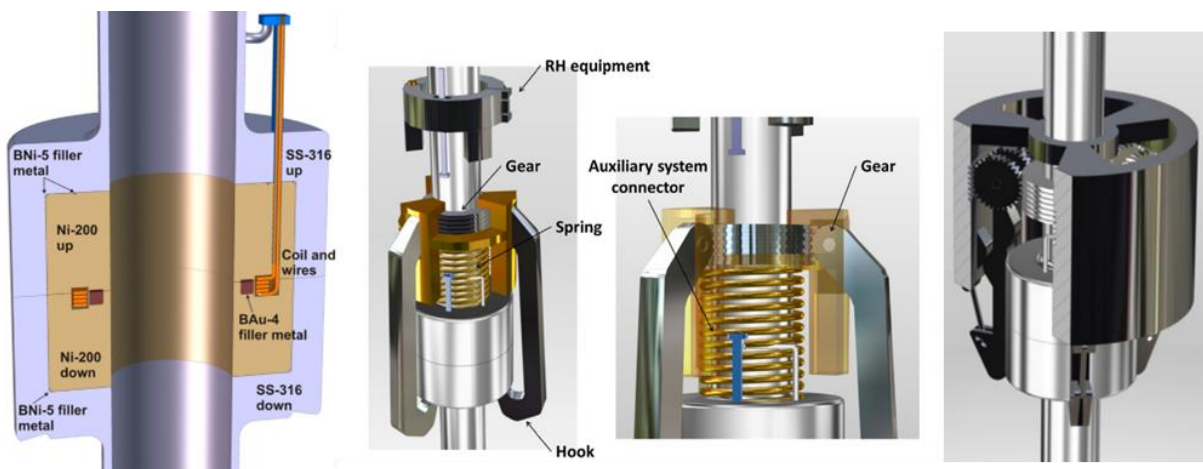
Brazed pipe connector and design of the clamping systems [119]
